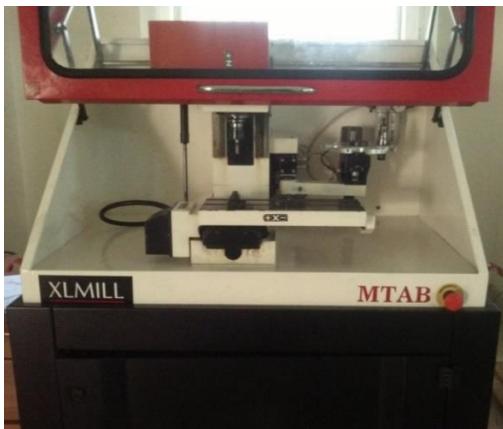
MTAB XL MILL CNC MILLING MACHINE
